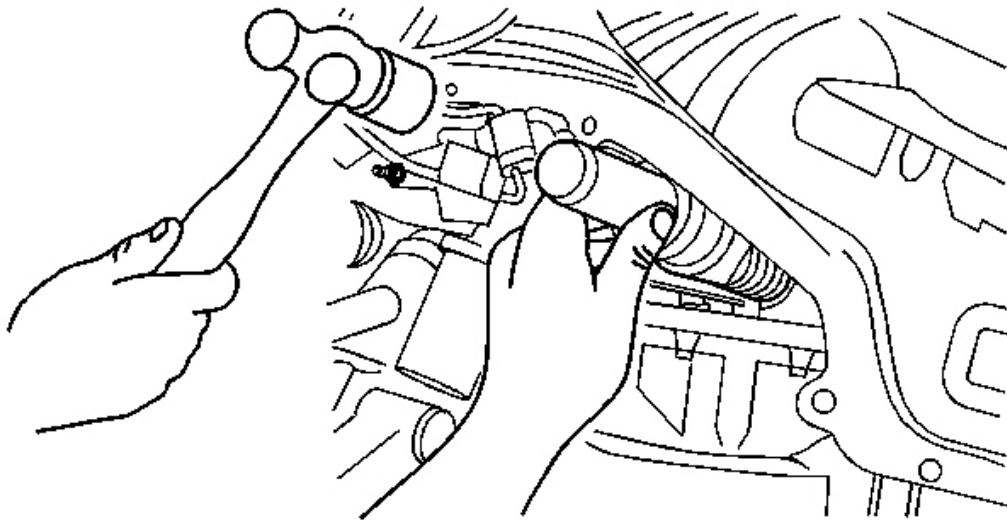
Installing The Oil Seal On The Oil Pump Housing
